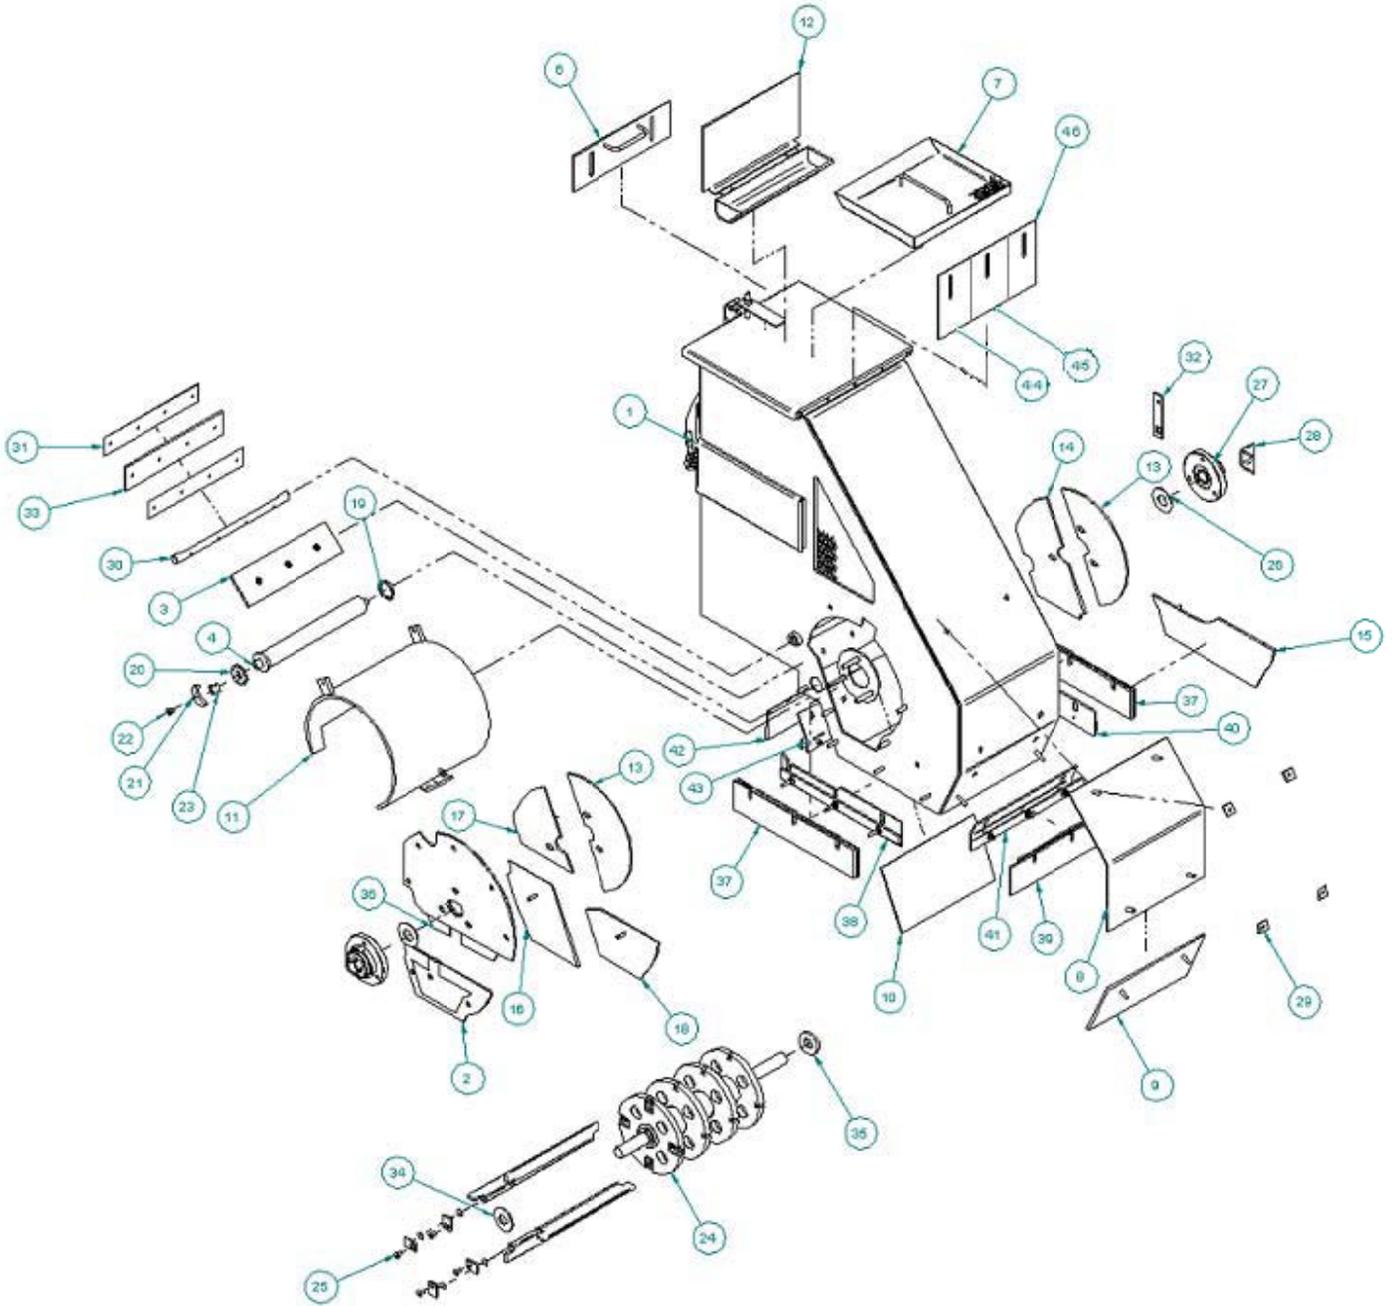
BLAST HEAD COMPONENTS EXPLODED VIEW
